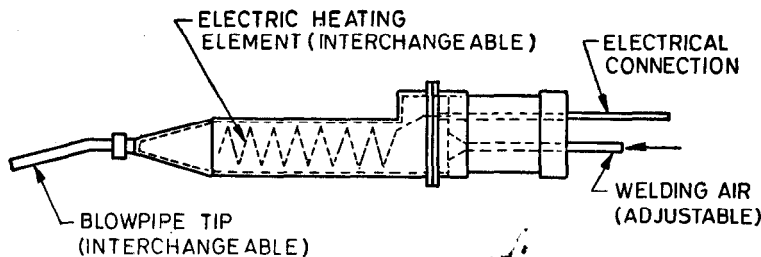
ELECTRICALLY-HEATED HOT AIR WELDING EQUIPMENT
